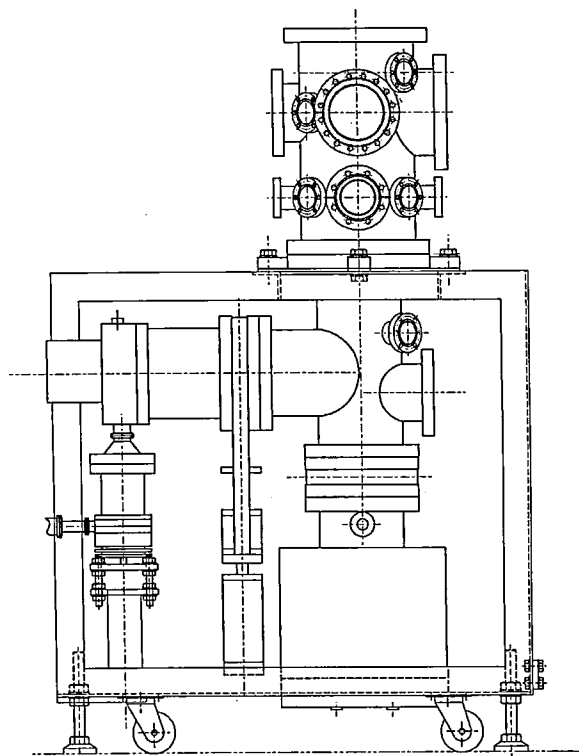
Outline design of the multi-purpose testing equipment in ultra-high-vacuum
